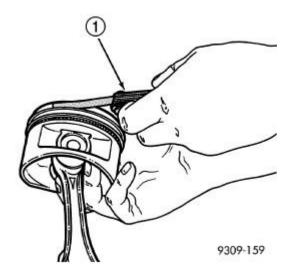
Measuring Piston Ring Side Clearance Courtesy of CHRYSLER LLC
